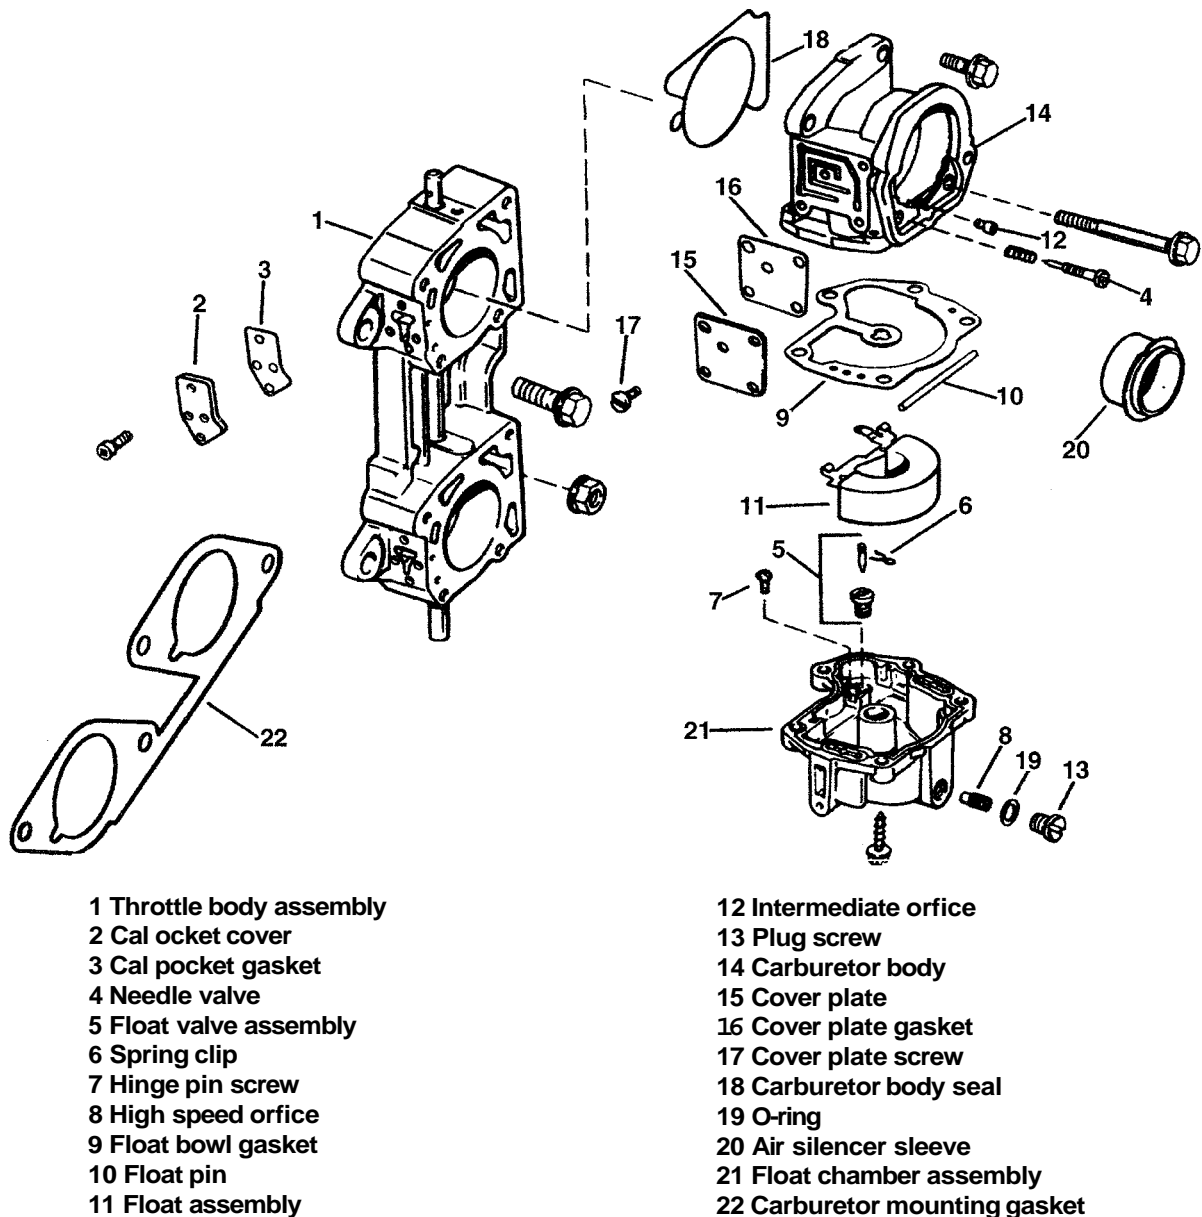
Exploded view of the modular carburetor assembly used on 120-300 Hp (2000/3000/4000cc) 90°, loop charged V4/V6/V8 motors (note V6 motors use an additional carburetor assembly on each side that contains a single carburetor body)
